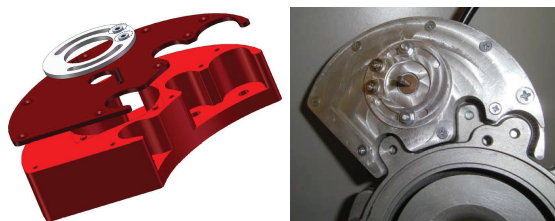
The stepper motor housing assembly. In the left an exploded view of the 3D model and, at right, the referred part already fitted in the turbocharger.
